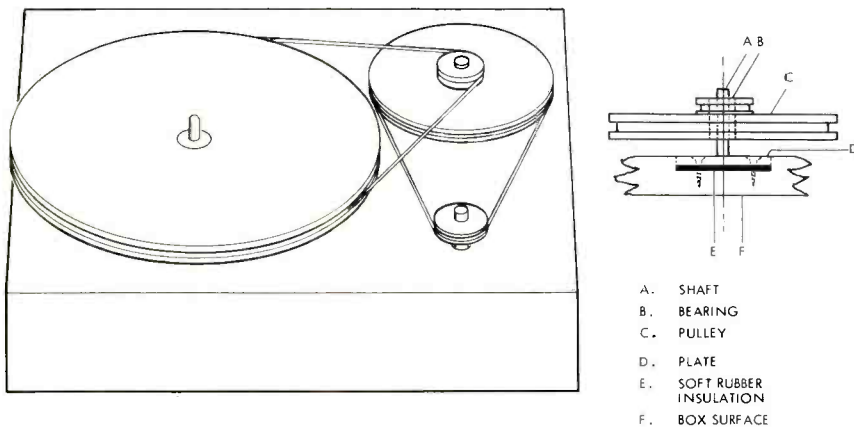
Dual-string drive with countershaft pulley for use with high-speed motors.
